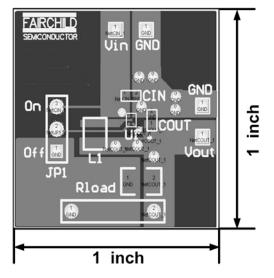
The FAN5350 Evaluation Board PCB (CSP)
